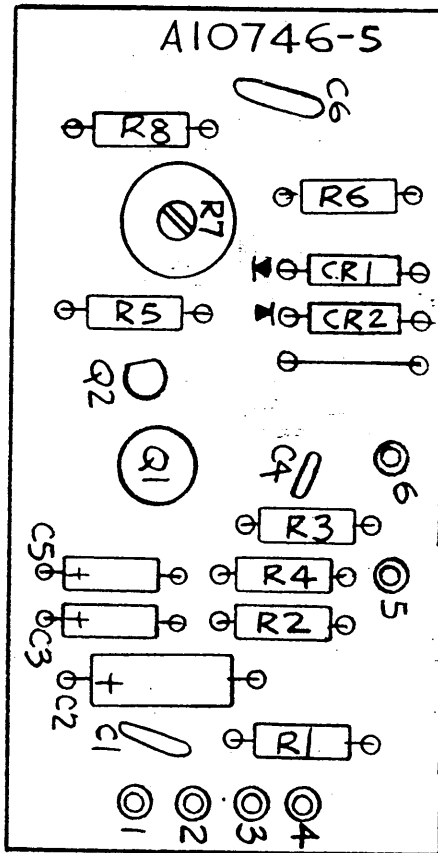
COMPONENT LOCATION, REGULATOR ASSEMBLY
